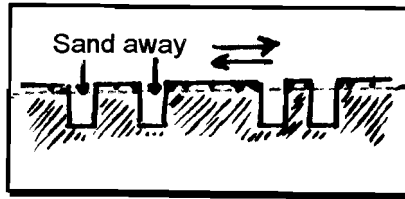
Same view, shows layer of surface that will be removed by sanding.
